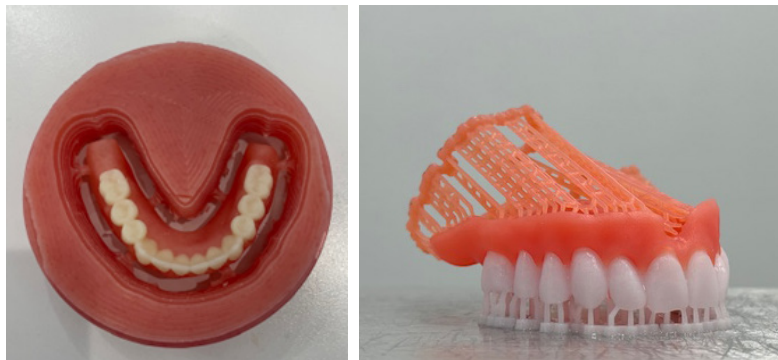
, left: Example of a PMMA milled denture, still in the puck
